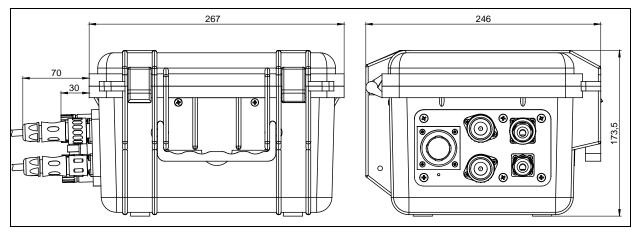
PCM 4 enclosure dimensions and connection sockets
